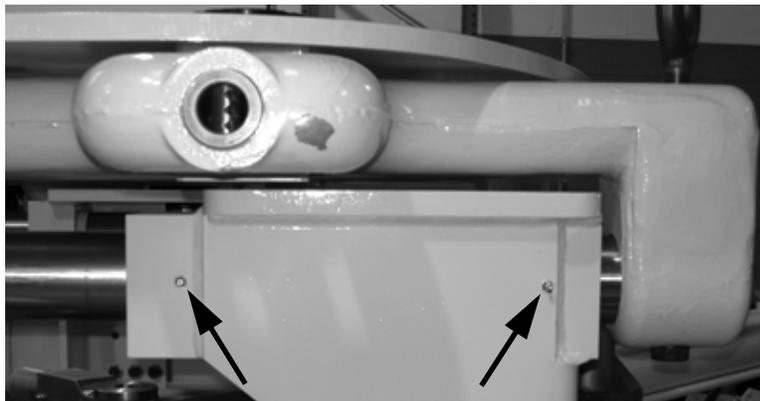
Grease fittings for the frame guide shaft on the open side of the frame.
